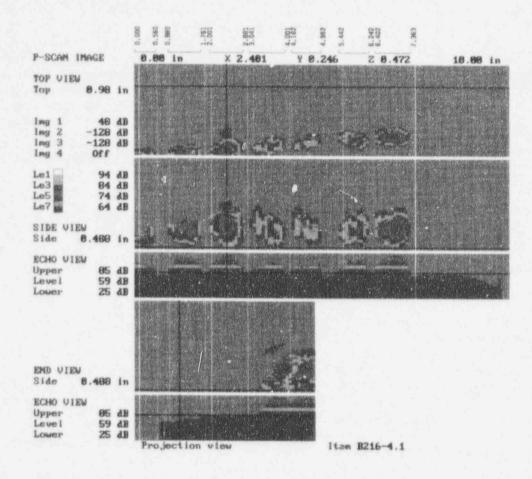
P-scan image of pipe specimen B-216 (7 saw cuts)
